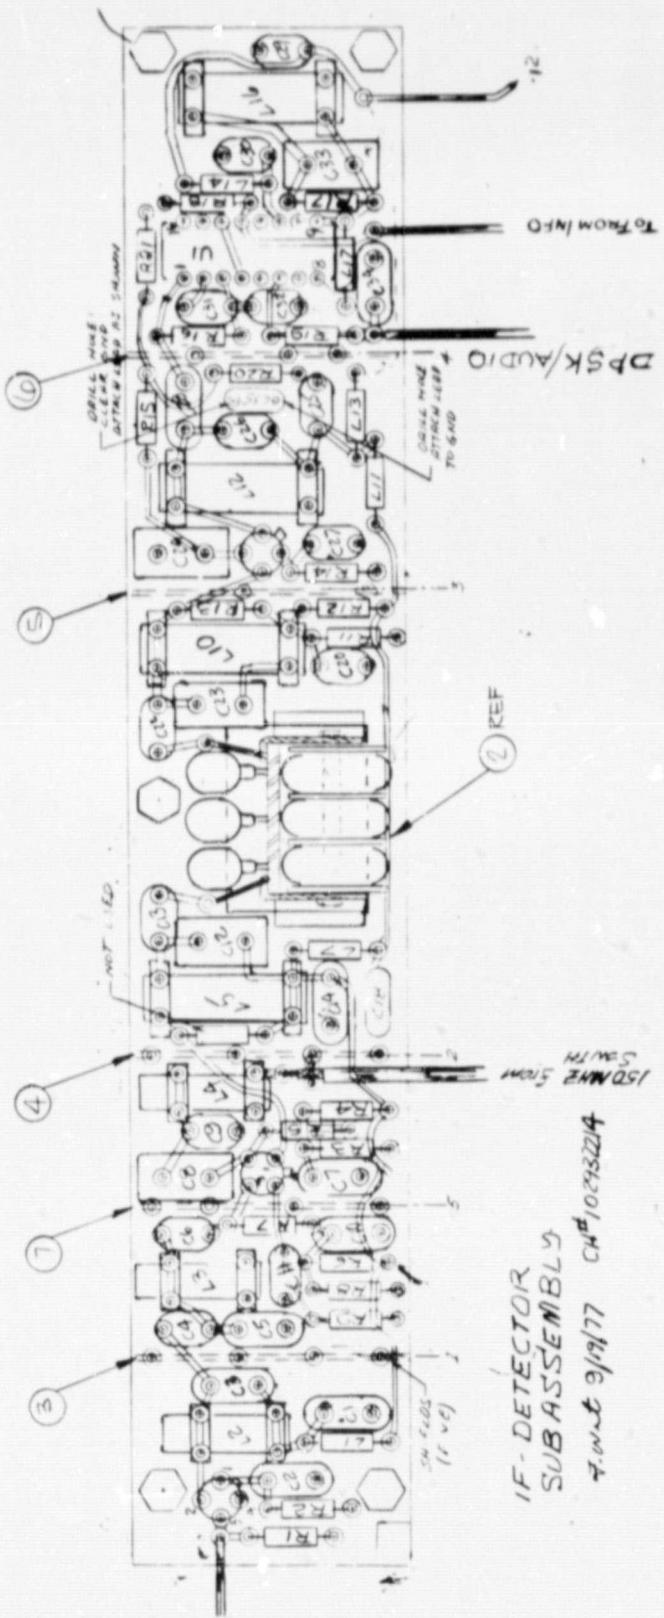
BOARD ASSEMBLY, IF/DETECTOR
